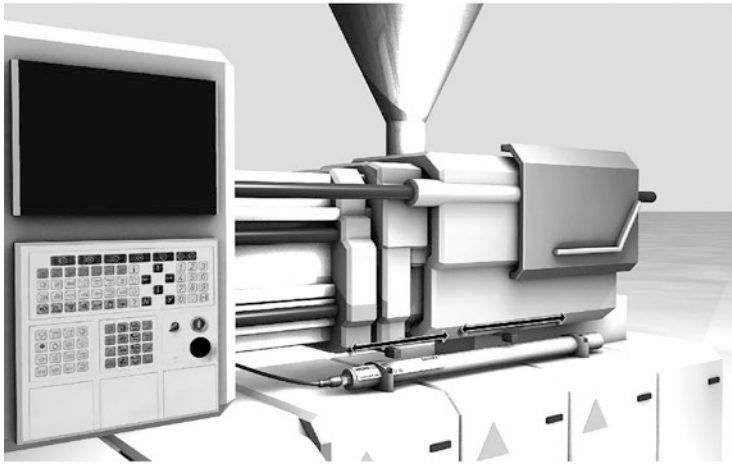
Injection moulding machine. The positions of the clamping unit and ejector are detected by a displacement sensor with two position sensors (Factory photo: Balluff GmbH)
